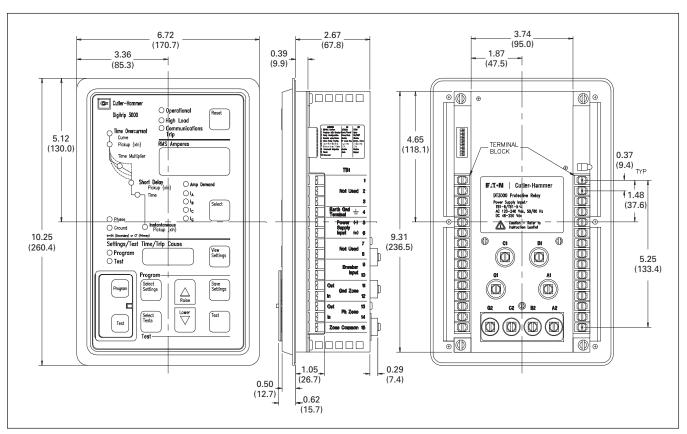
Digitrip 3000 — Dimensions in Inches (mm)
